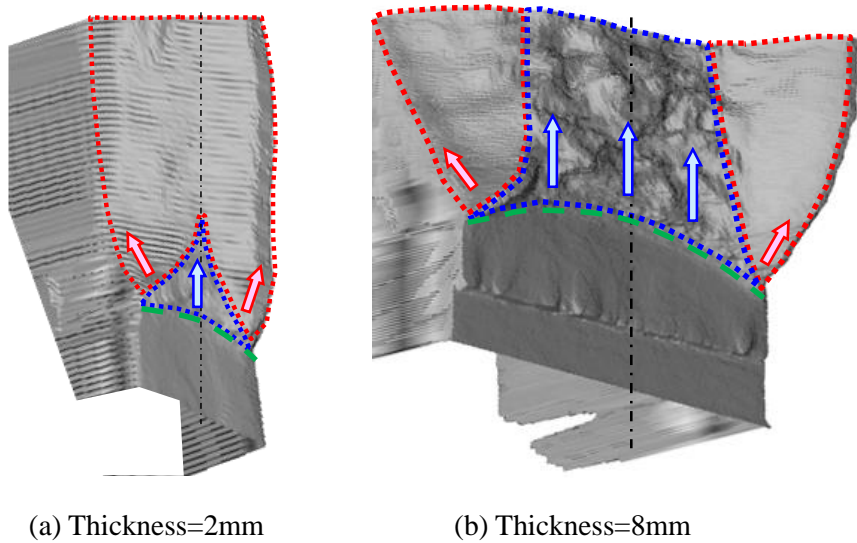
Dimple fracture zone(blue area) and shear-lip fracture zone(red area)
